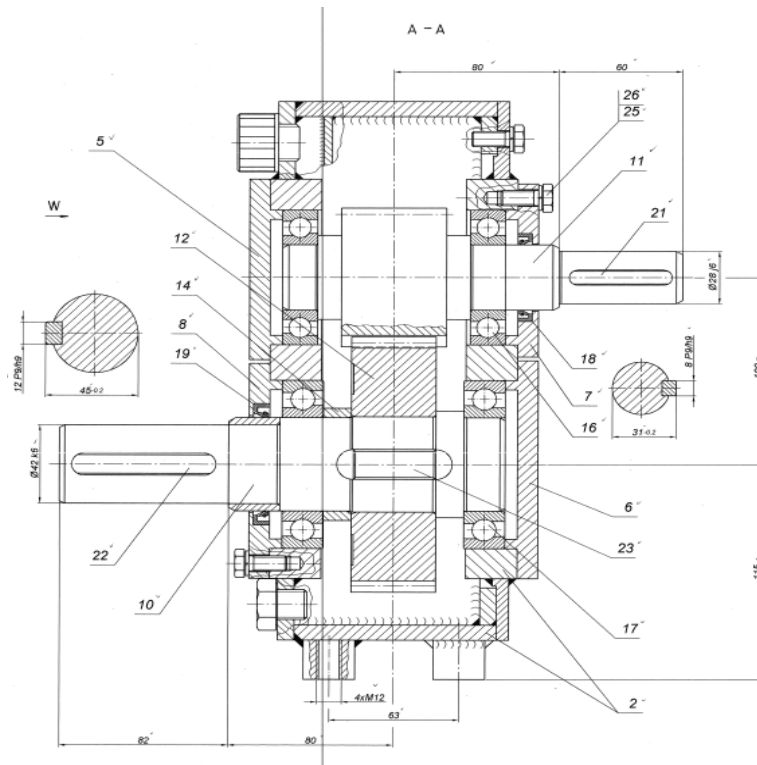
Diagram of analysed gearbox: 2 – body; 5, 6, 7, 8 – bearing caps; 10 – roller; 11 – pinion; 12 – toothed wheel; 14 – spacers; 16, 17 – bearings; 18, 19 – seals; 21, 22, 23 – inlets; 25, 26 – washers, screws
